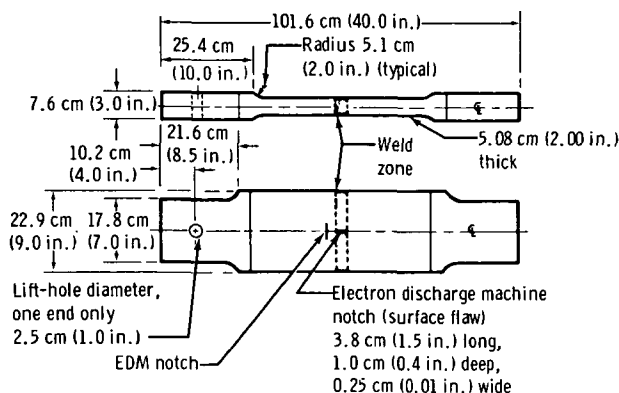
Surface flaw cross-weld fracture specimen.
